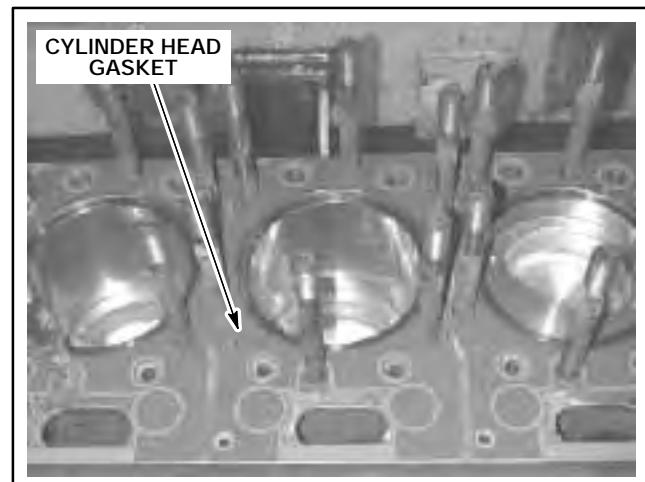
Cylinder Head Gasket - P/N 300000D
